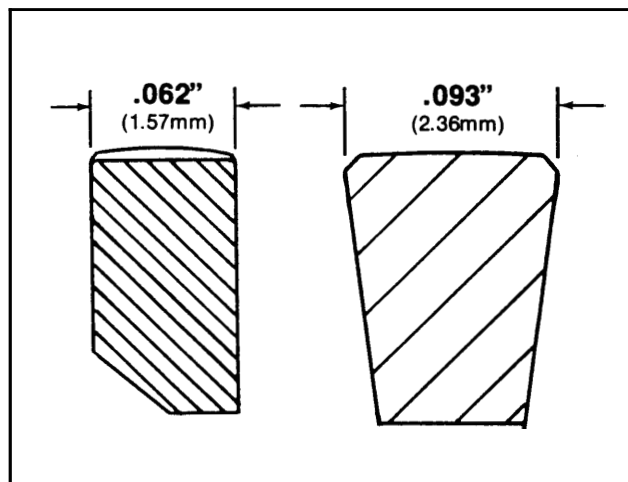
Rectangular Ring (Left) and Keystone (Tapered) Ring (Right)
